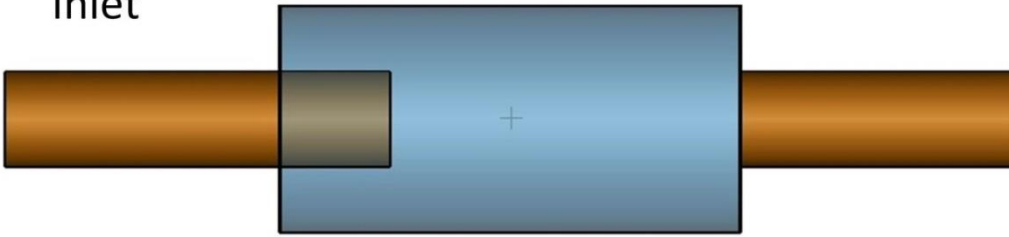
Simple Large Muffler LM10, Other Details / Dimensions as per LM2
